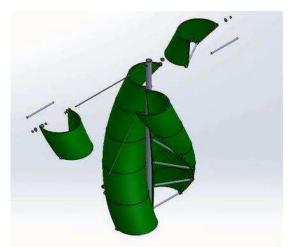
Sketch for Turbine Blade and Shaft Design.
